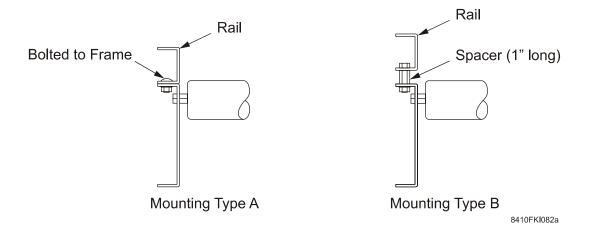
Fixed Side Guide Rails and Mounting Types
